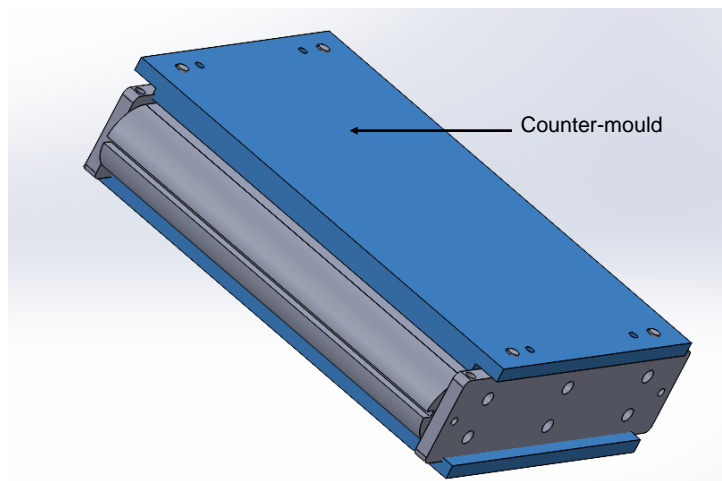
3D model of the counter-moulds used to fix the thickness of the composite and to ensure the sealing of the mould during curing
